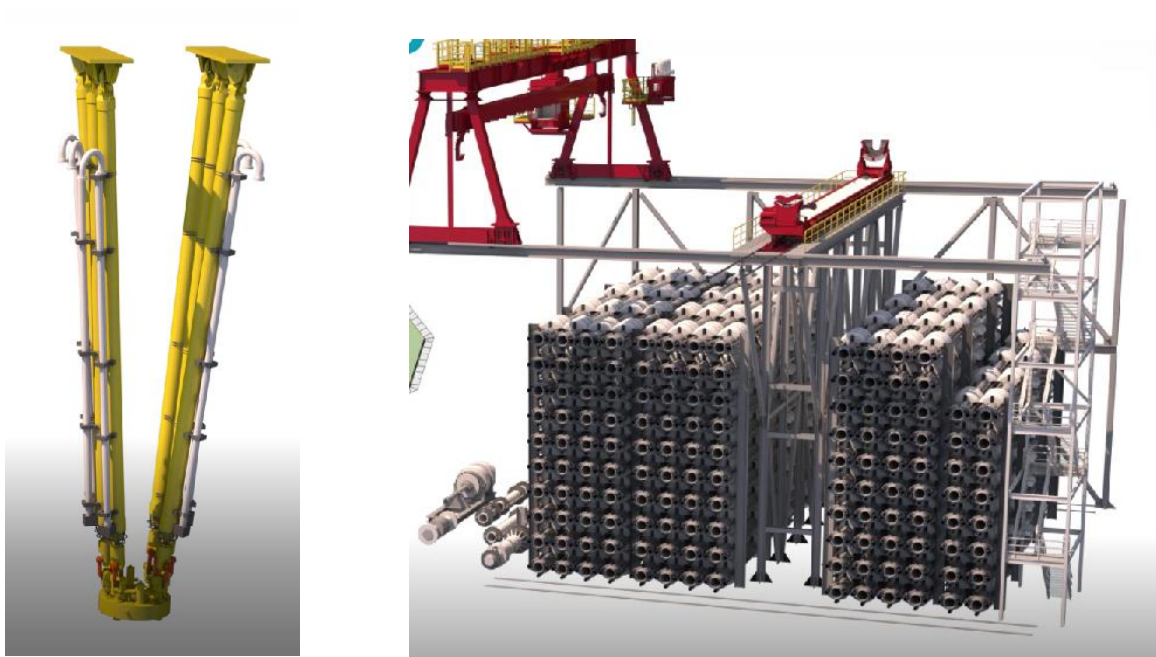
(a) Direct Riser Tensioners (b) Riser String Storage Room (mhwirth)
